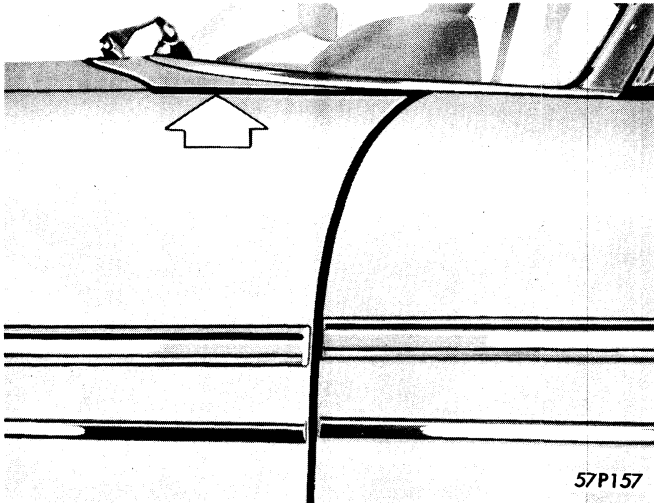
Top Rear Edge of Fender Lower Than Front Door
